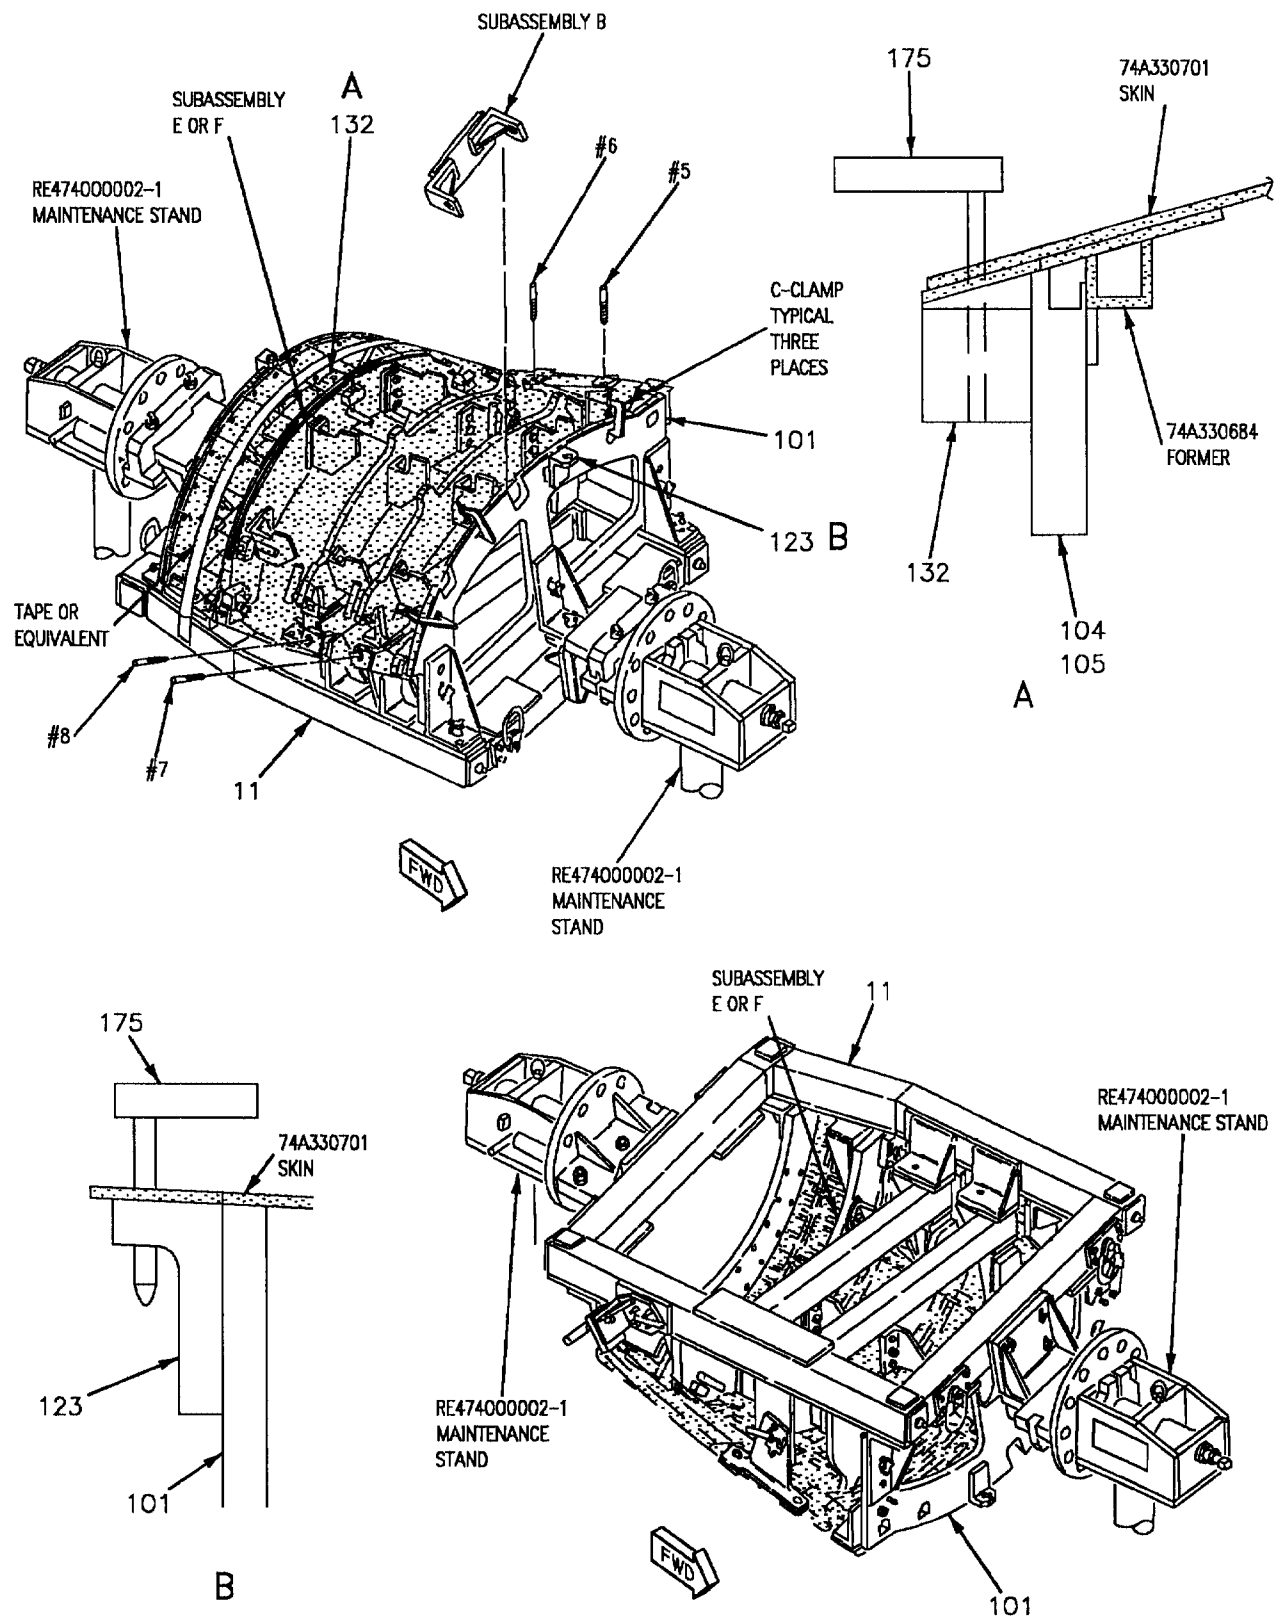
Maintenance Fixture RE174330616-1, -2 Details for Skin Replacement (Sheet 1)
